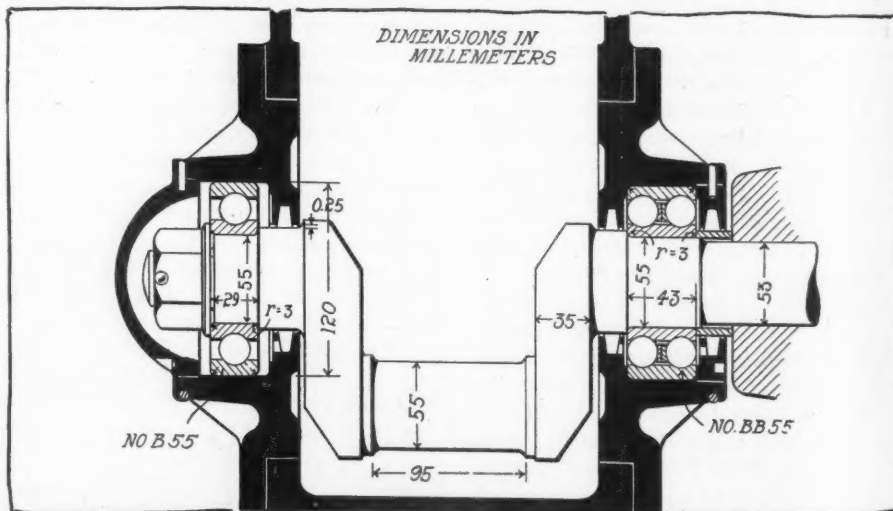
SINGLE-THROW CRANKSHAFT WITH DUAL TYPE BEARING
